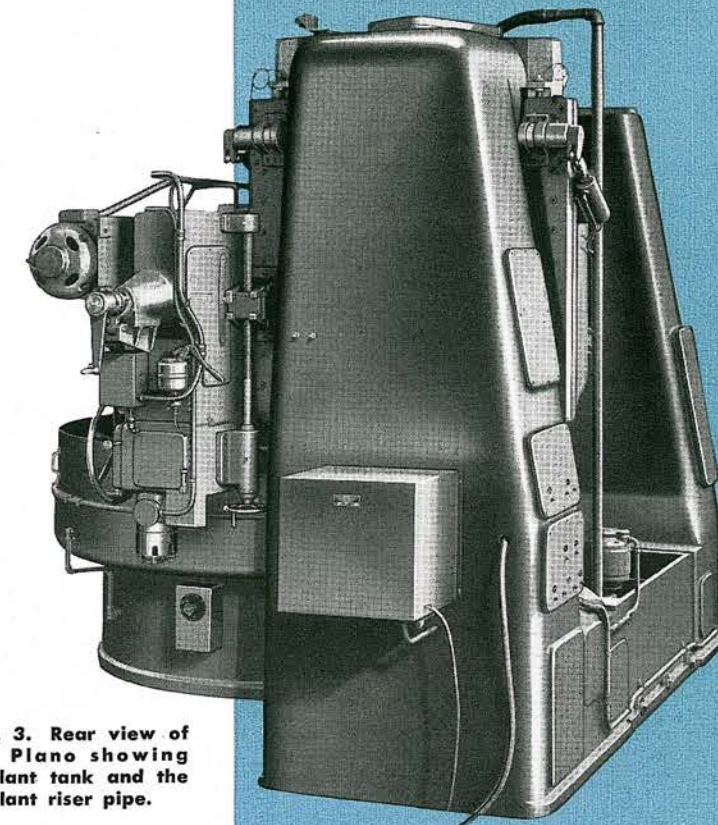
Rear view of the Plano showing coolant tank and the coolant riser pipe.
